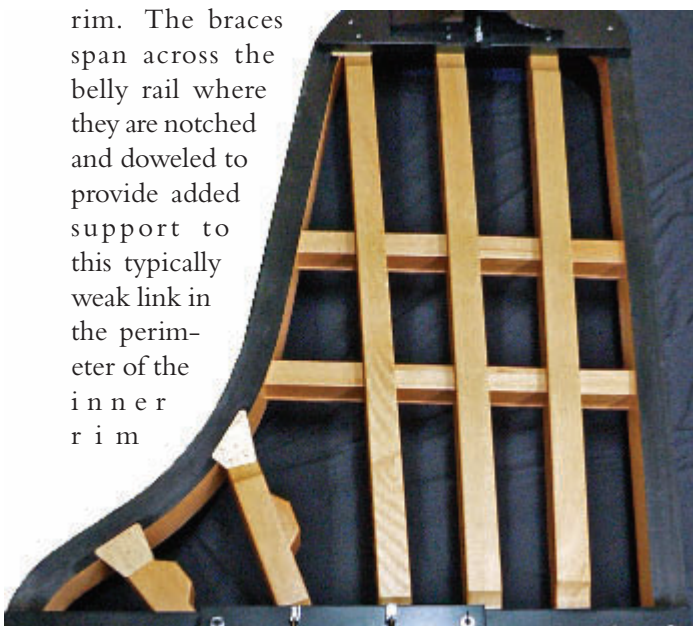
Bottom of the 275, showing bracing layout, cross members, and dovetail joints.
